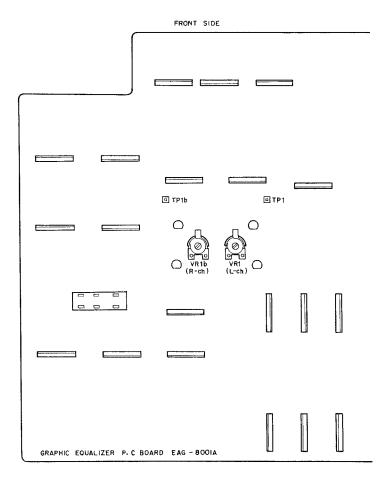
Graphic Equalizer P.C Board (EAG-8001A)
